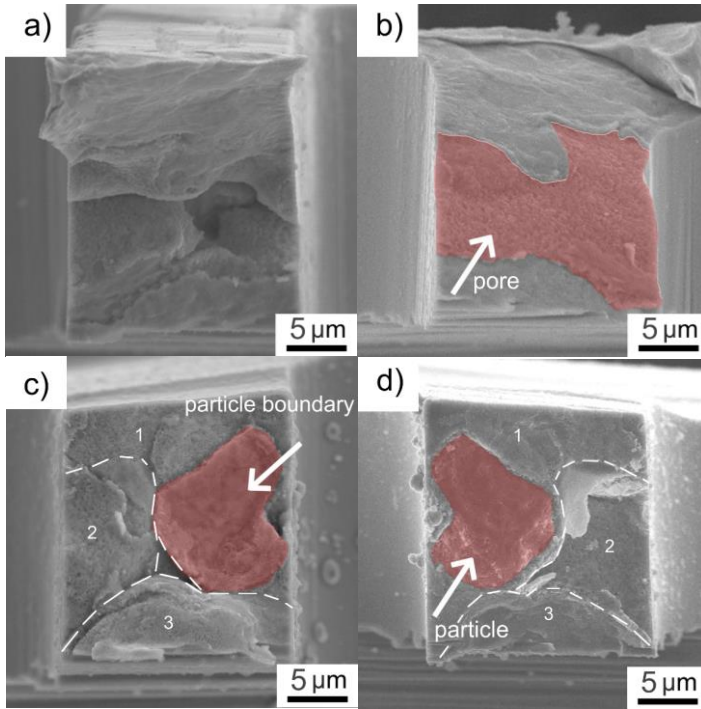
a) Fracture surface of a type-1 boundary with a smooth structure, b) Opposite fracture surface of a) showing that a pore with a rough surface (marked in red), c) Fracture surface of a type-3 boundary showing 3 particles. The crack ran first along the particle-boundary interface, particularly on particle 3. Particle 1 and 2, though, are only partially covered by the boundary (marked in red on particle 1), d) Opposite fracture surface of c). The crack crossed the particle boundary in particle 1 and 2 ran along the other particle-boundary interface (the uncovered particle 1 is marked in red).
